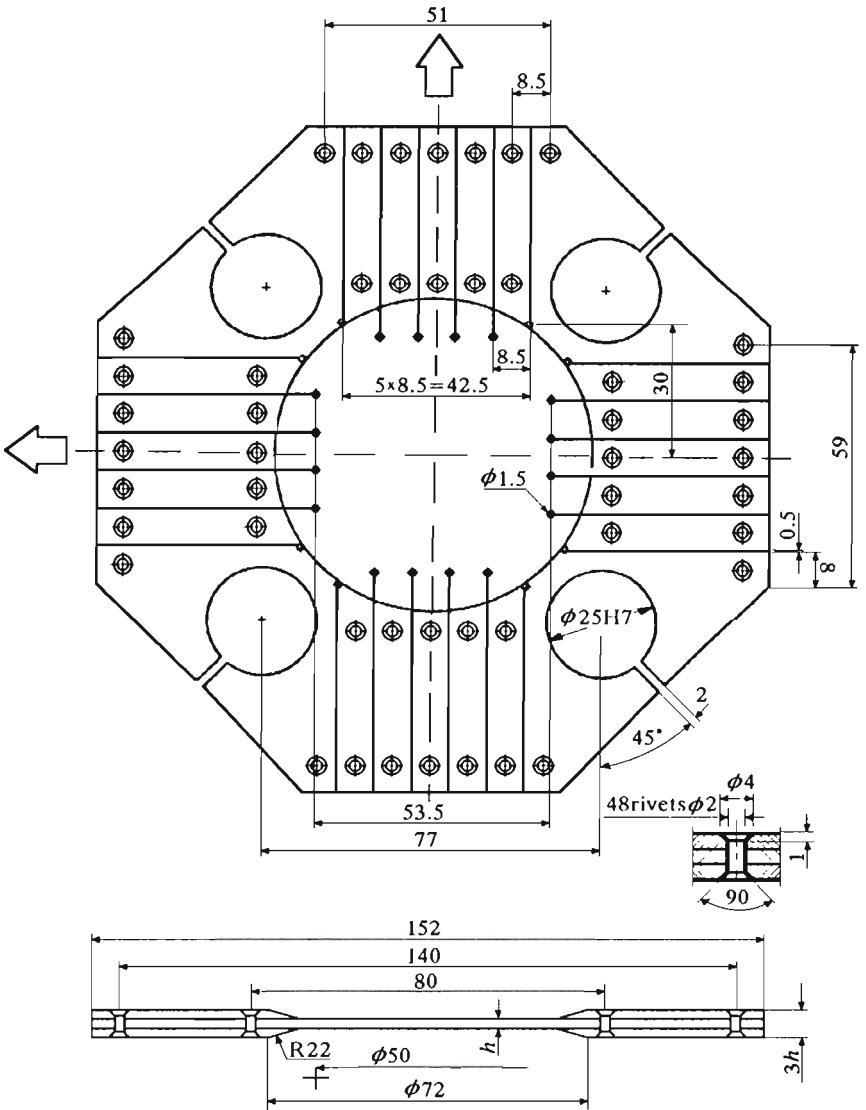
Biaxial tensile flat cruciform specimen (all dimensions in mm)
